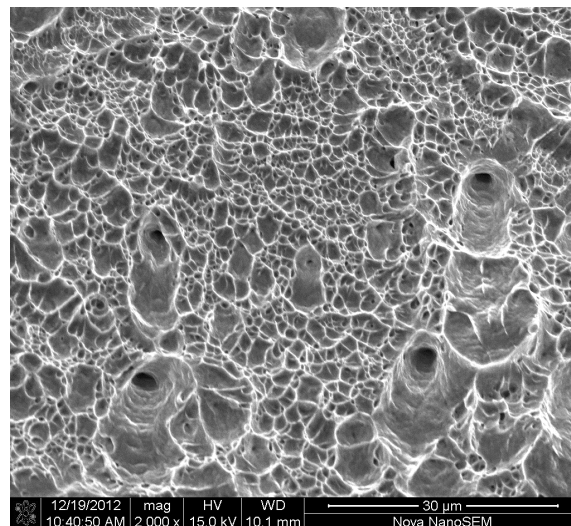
4 Fractograph of post tensile weld SS 308 specimen
